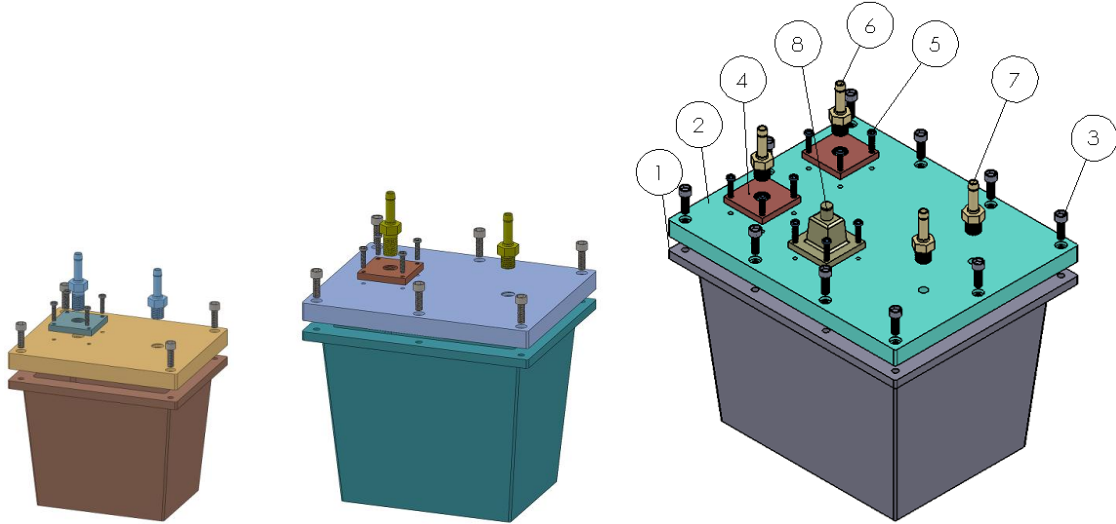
Exploded view of supply tanks 11, 21 and 51
